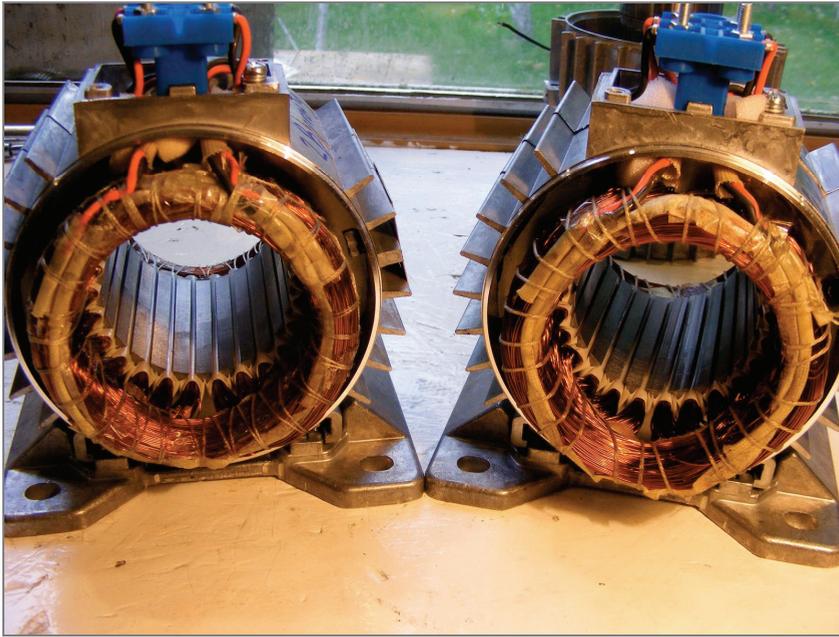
Stators of the built motors: unskewed (left) and skewed (right)
